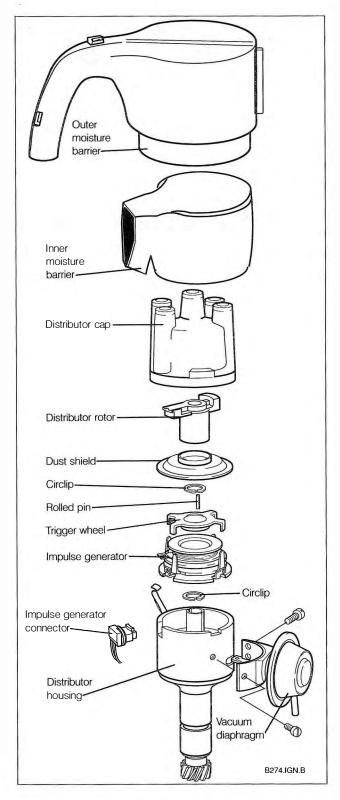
Exploded view of distributor assembly installed on cars with 4-cylinder engines.
